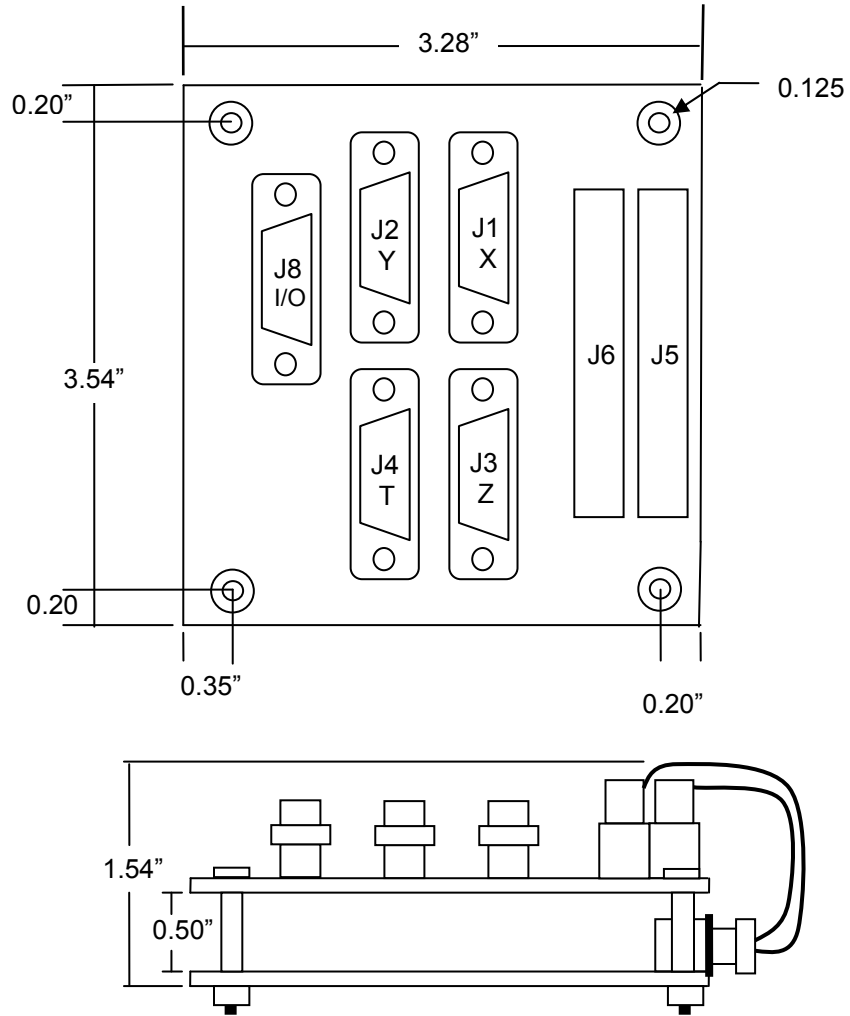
UIO DIMENSIONAL DRAWING
